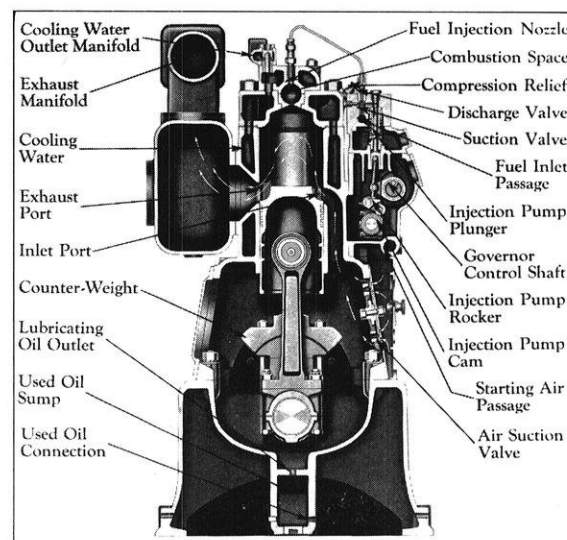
Sectional view through a two-cycle airless injection Diesel engine of the block cylinder type designed for 800 r. p. m.
